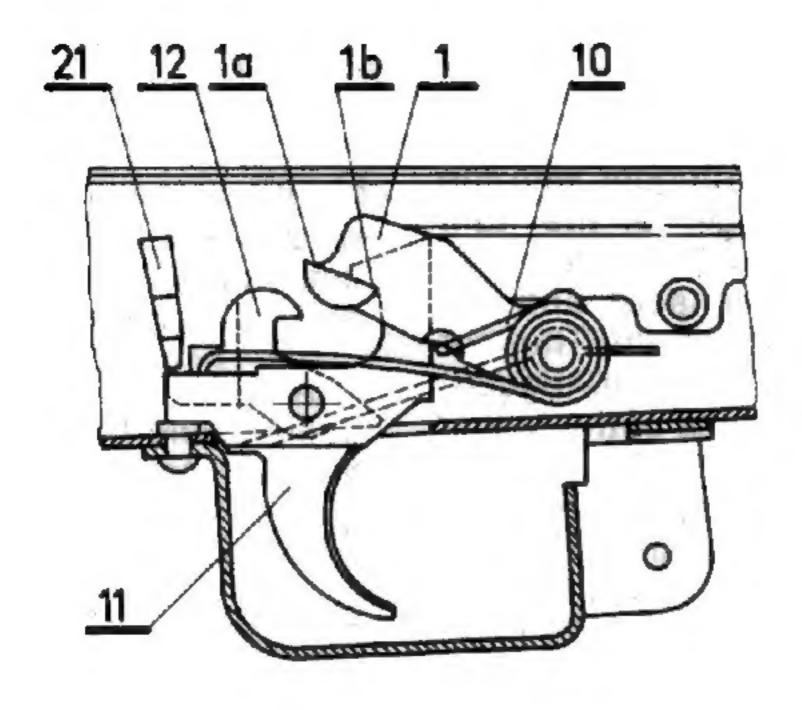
TRIGGER MECHANISM SET ON SAFETY 1- HAMMER, 1a- DISCONNECTOR NOTCH, 1b- HAMMER COCK NOTCH, 10 HAMMER AND TRIGGER SPRING, 11- TRIGGER, 21- SELECTOR LEVER, 12- DISCONNECTOR.
